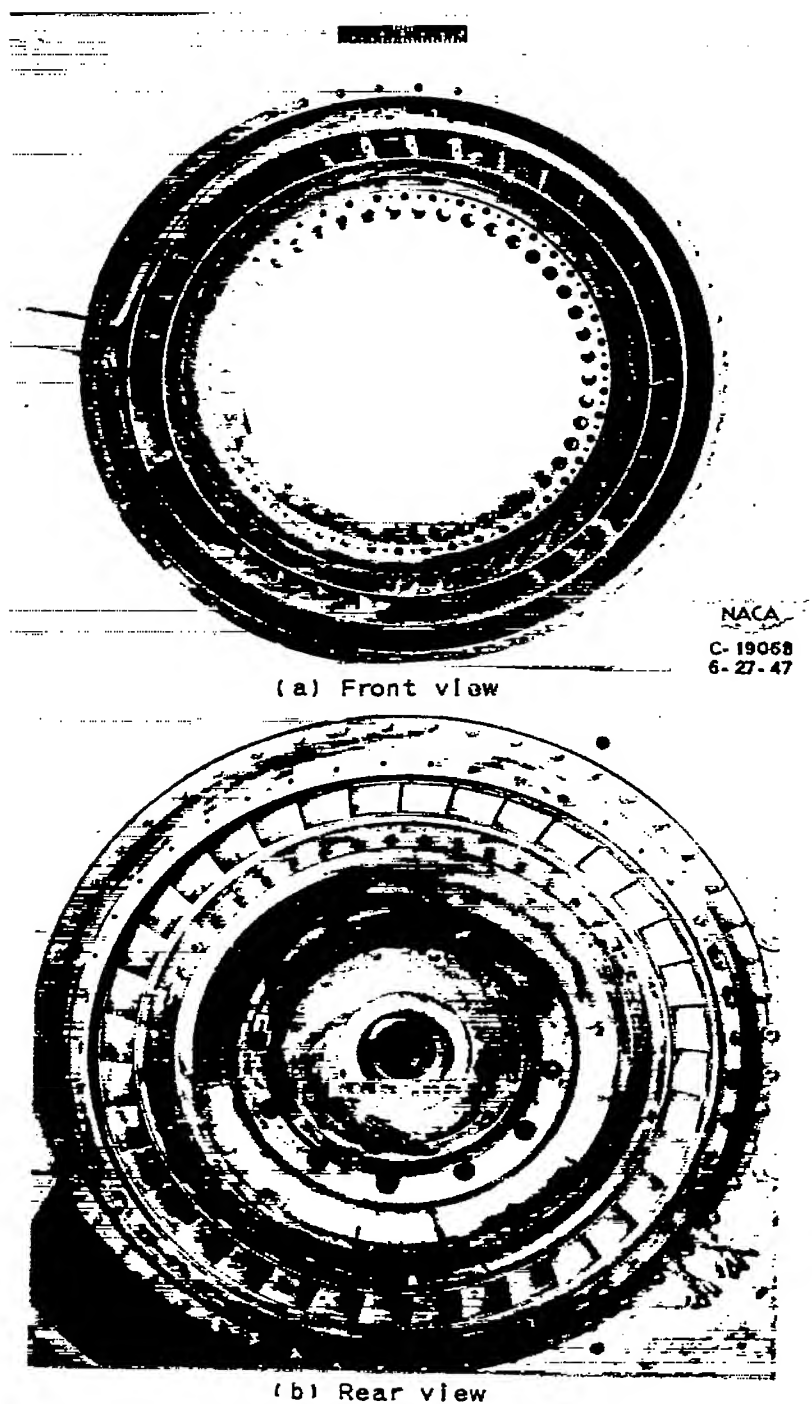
Turbine nozzle of TG-100A gas turbine-propeller engine.
